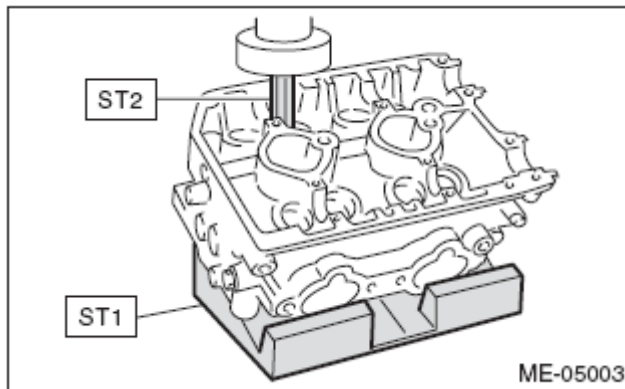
Removing Cylinder Head Valve Lifter Using Valve Spring Remover
